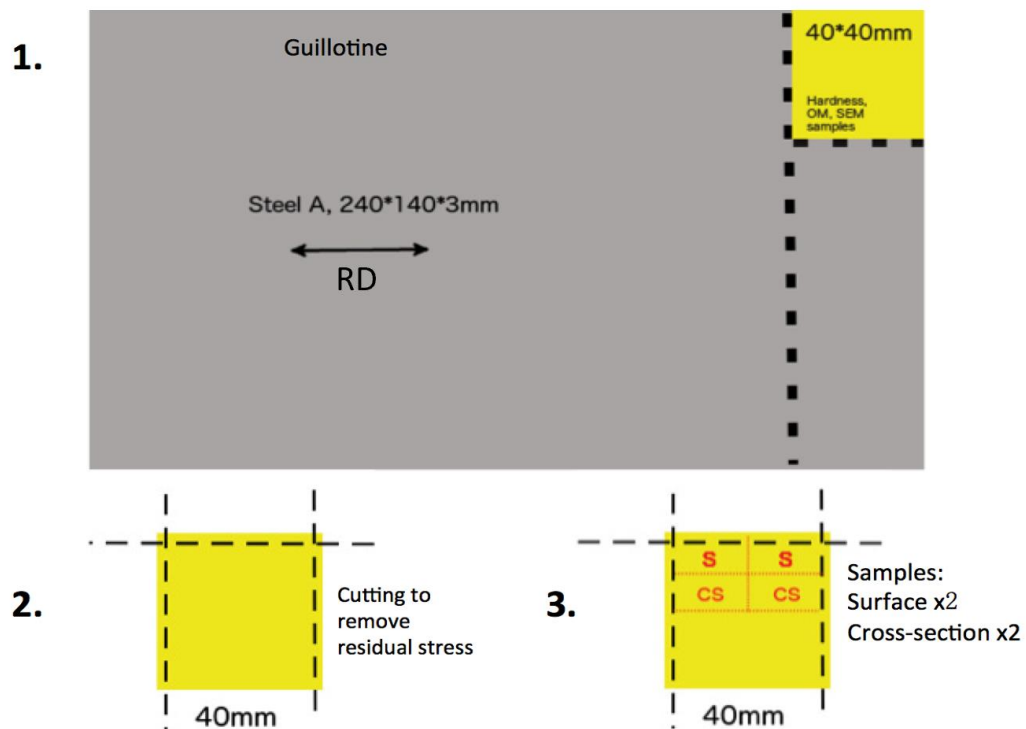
Cutting plan for sample sheets. Two identical samples are cut within the same sheet location (as shown in 3.) to test both of the hot and cold conductive mounting methods. The sheet rolling direction is labelled.
